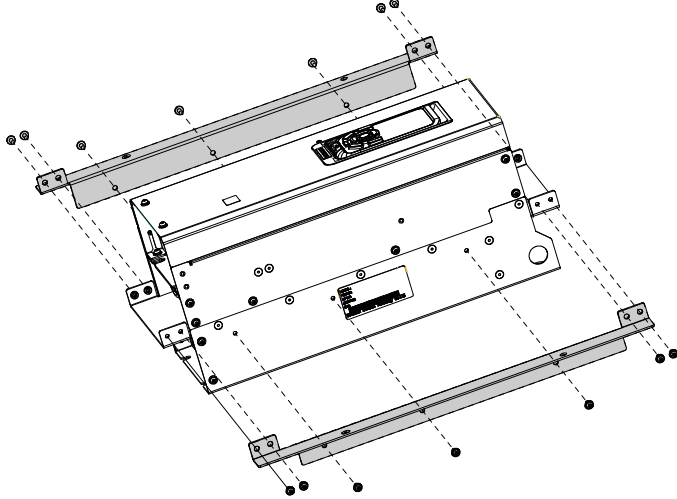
Installing the mounting brackets to the AC drive (T1 to T9 models)
